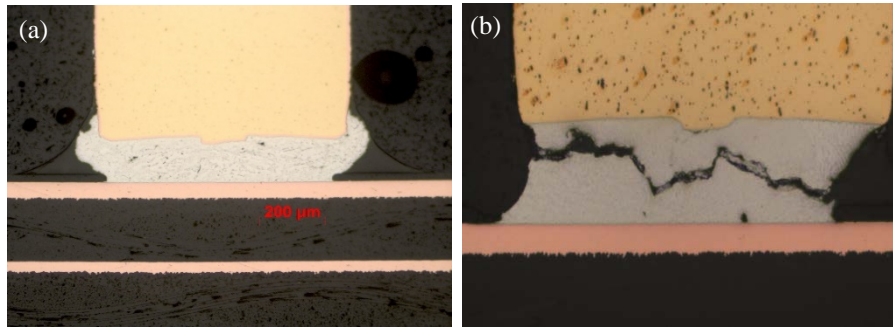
Improper solder joints created with 8 mil stencil (a) solder joint with wetting (b) hourglass shape joint.
